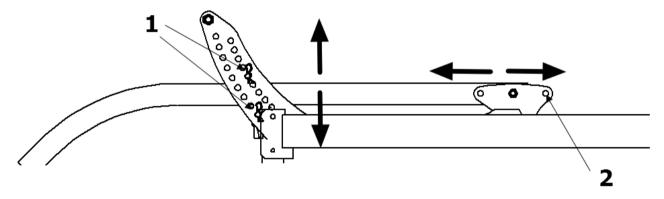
Depth and shaft distance adjustment: 1 - bolts for adjusting the working depth with a stabiliser plate; 2 - screw for fixing the shaft arms.
